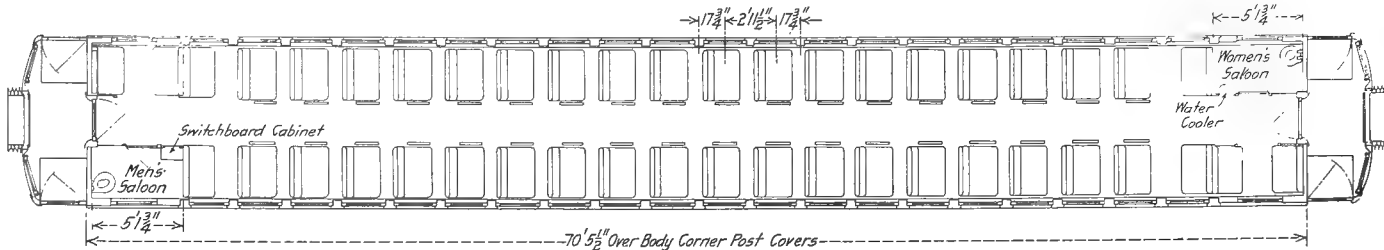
Floor Plan of New York, New Haven & Hartford Steel Day Coach.
